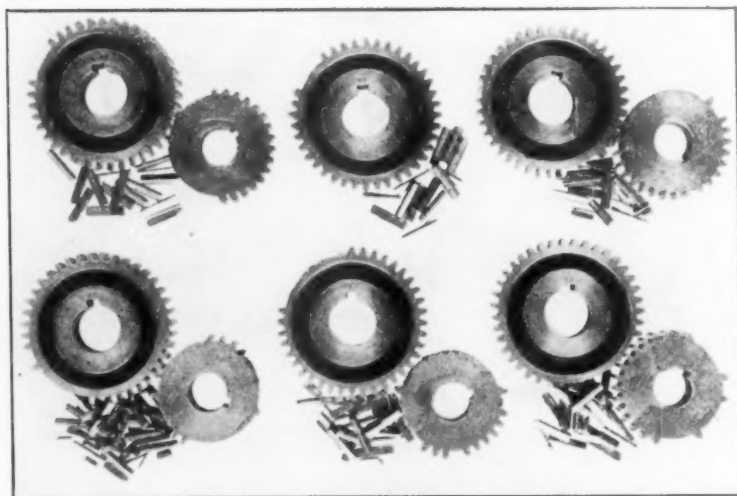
30 TOOTH ENGAGING 40 TOOTH, TESTS 18—23 INCLUSIVE, SERIES 2
